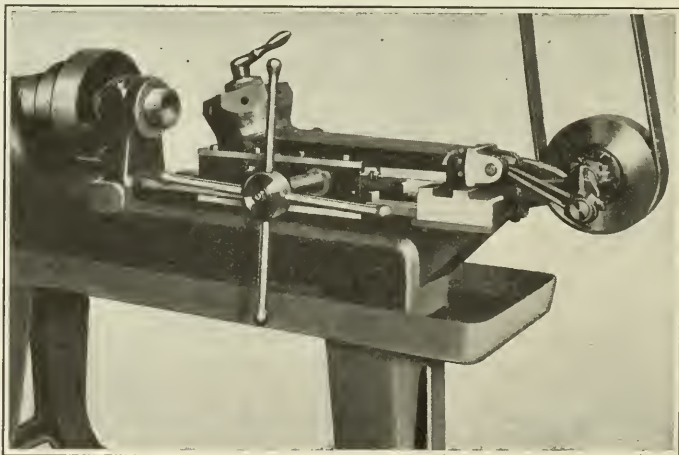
Turret Head attached to Fixture that revolves Head and moves Slide and Saddle
